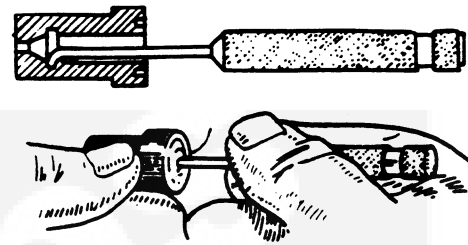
NOZZLE AND HOLDER ASSEMBLIES
